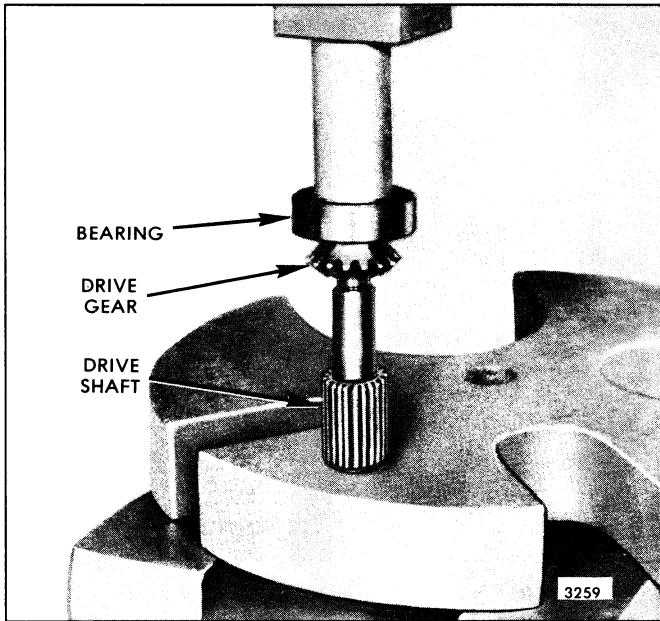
Installing Gear and Bearing on Governor Drive Shaft
